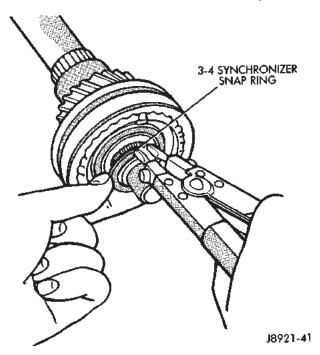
Remove 3-4 Synchronizer Snap Ring
